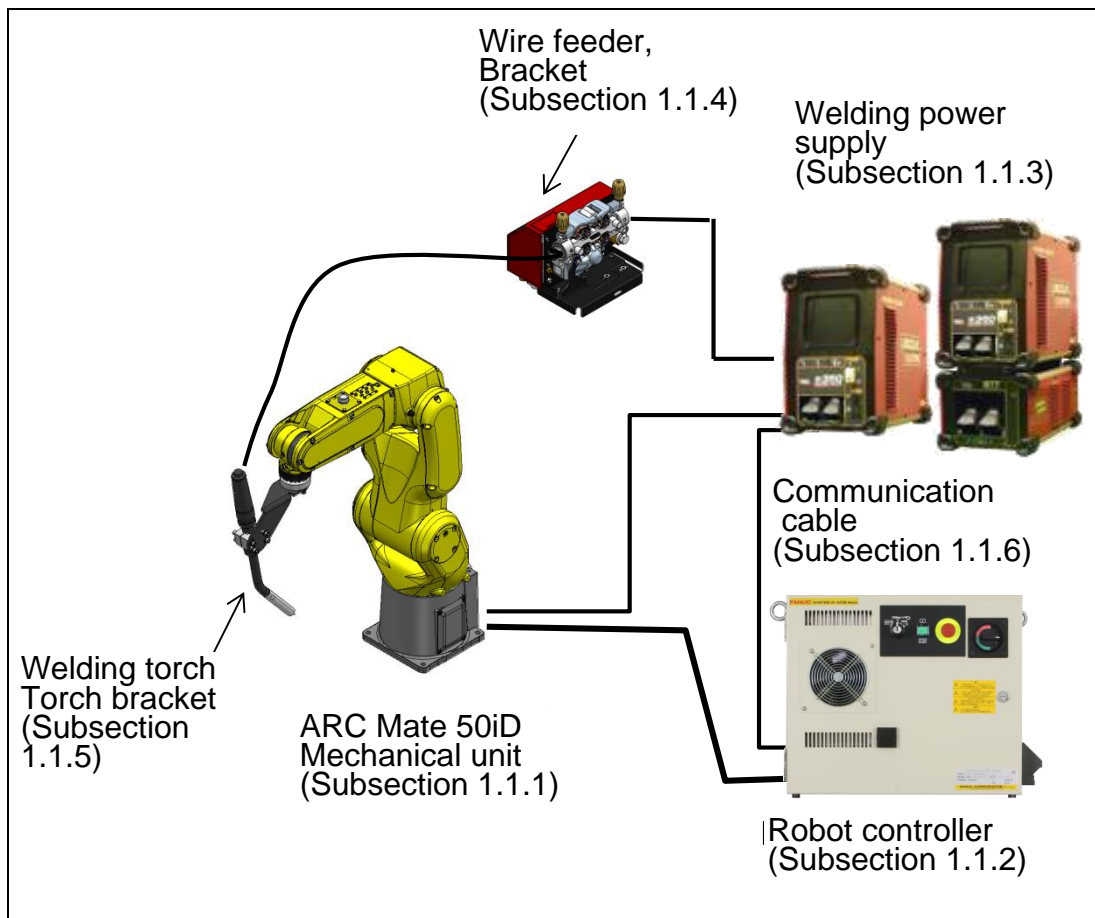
(b) Configuration of robot with welding power supply option
